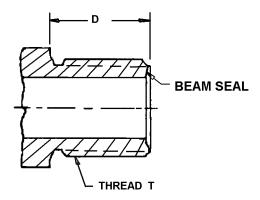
Type Q-fitting end per SAE-AS85421/2 style 2 standard beam seal.
